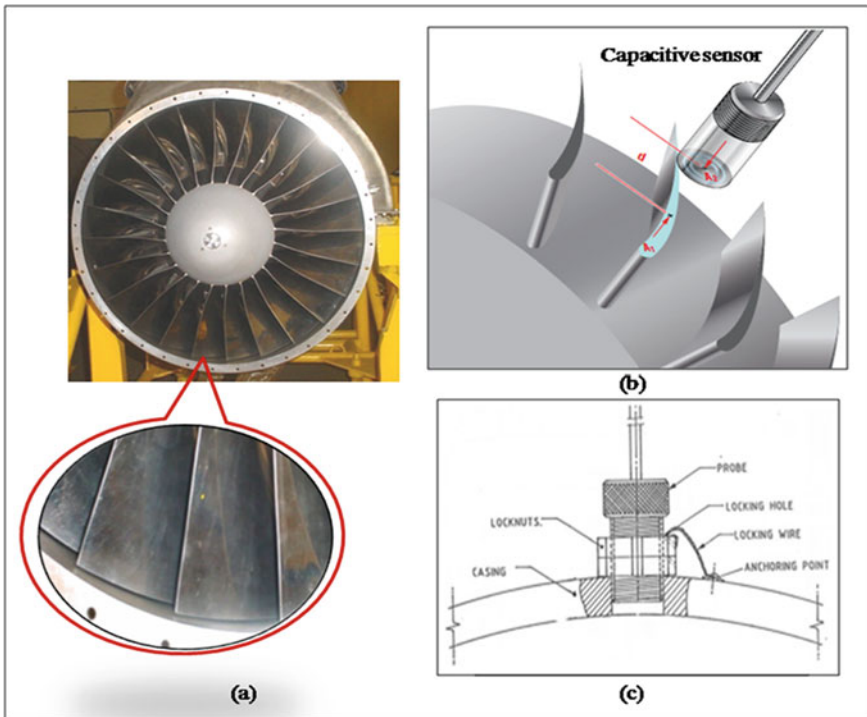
Tip clearance measurement (a) Clearance between rotor tip and casing (b) Measurement concept (Courtesy: AOIP, www.aqip.com) (c) Sensor installation
